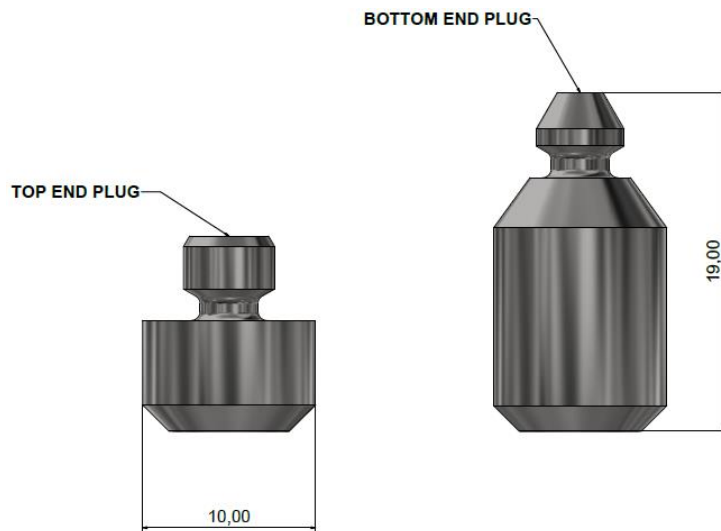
Side view models of two nuclear fuel rod endcaps, illustrated in Figure 1-1. Dimensions are in mm.
